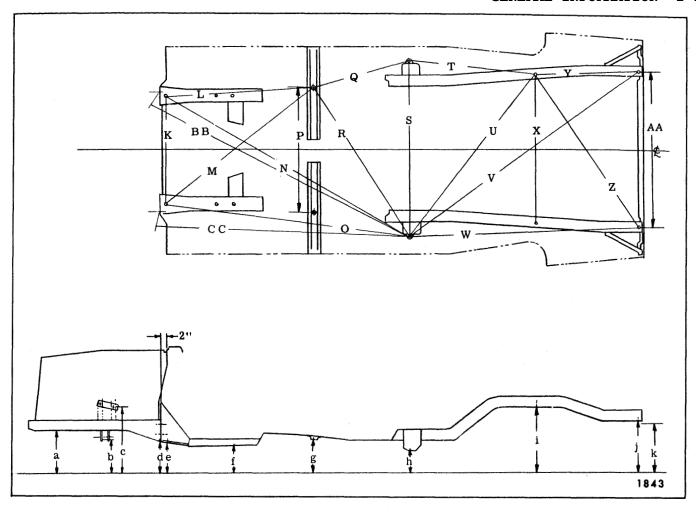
Horizontal and Vertical Dimensions (Body Assembly)
